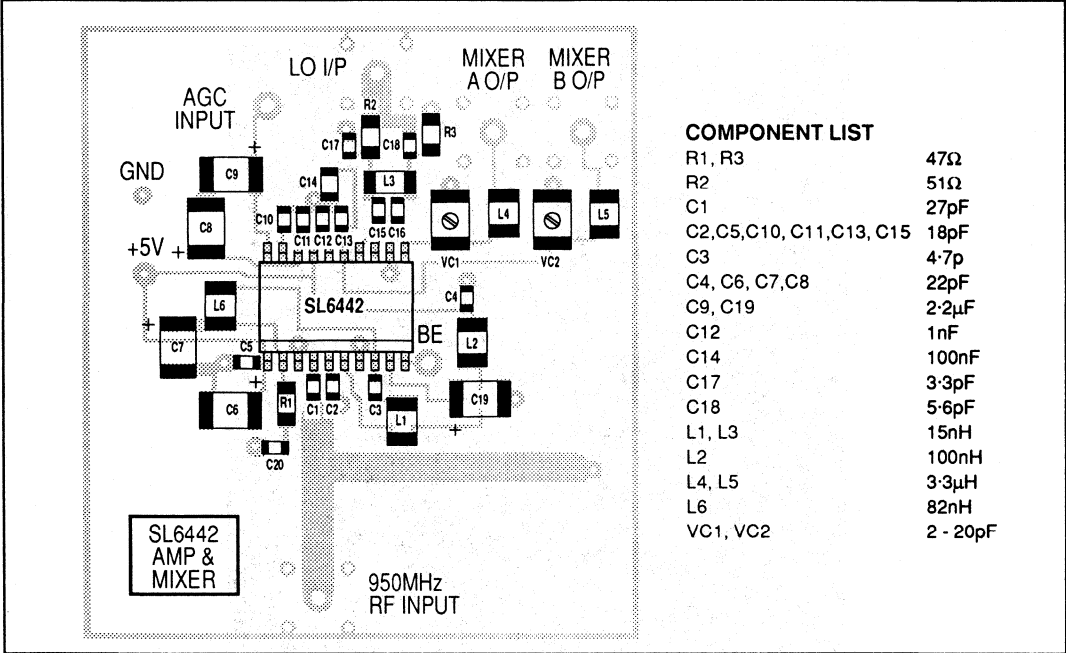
SL6442 demonstration board component layout. Scale=2 x full size. Input and output coaxial connectors are mounted on the ground plane side of the board.
